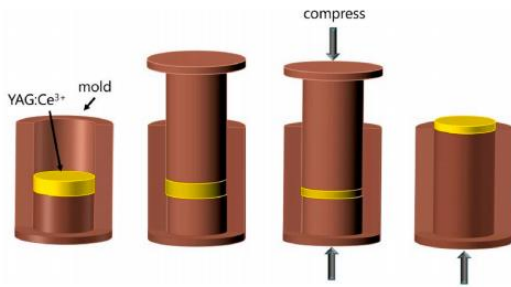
Schematic illustration of hot pressing sintering mold and sintering process [71].
